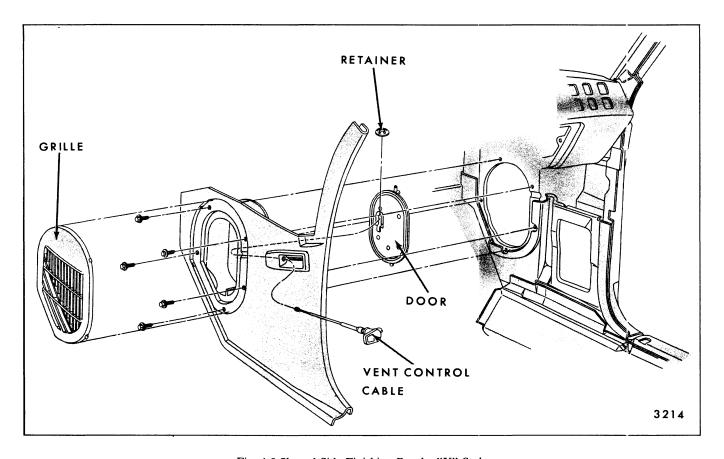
Shroud Side Finishing Panel - "X" Styles
